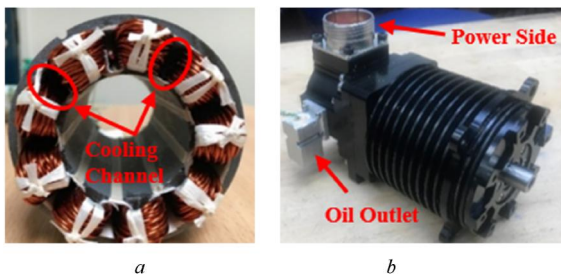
PMSM prototype (reference motor). (a) Stator core with winding and details of the cooling channel. (b) Assembled PMSM.
